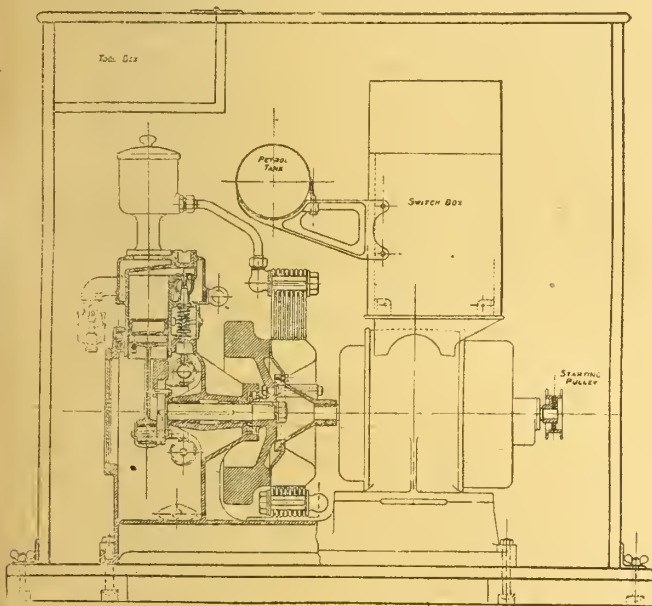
SECTIONAL VIEW OF AUSTIN PORTABLE POWER PLANT.
